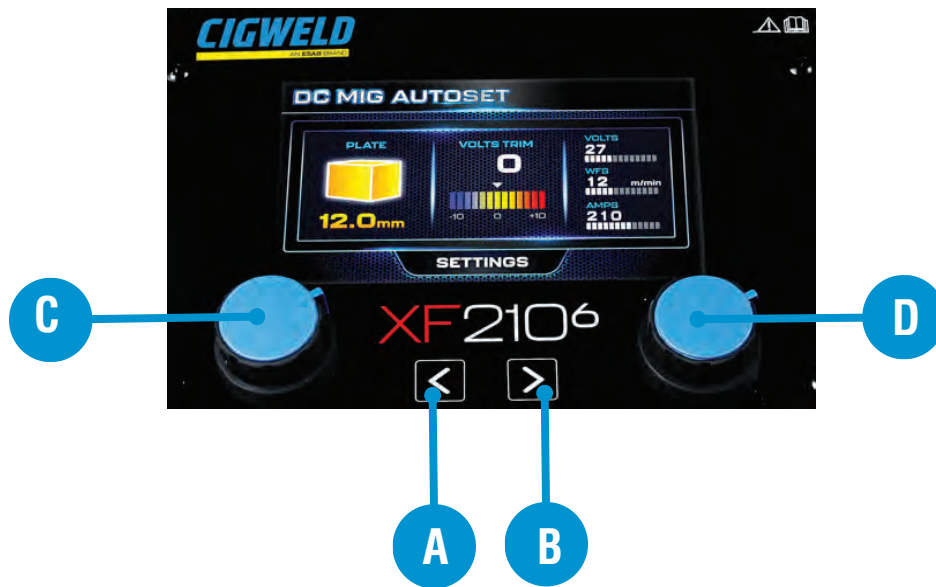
MIG (GMAW) Mode And Setup With Spool Gun For Gas Shielded MIG Wire
